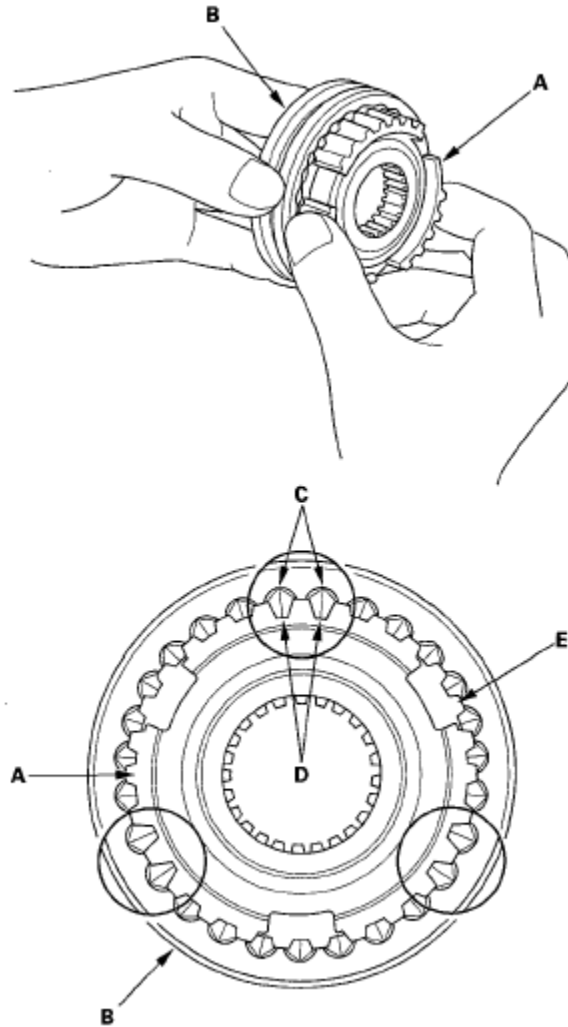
Inspecting Gear Teeth On Synchro Hubs And Synchro Sleeves
